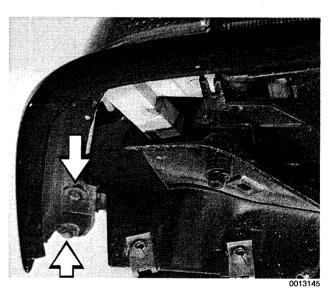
Front bumper must be off to access far right and left front panel retaining screws from below (arrows). (Right side shown.)
